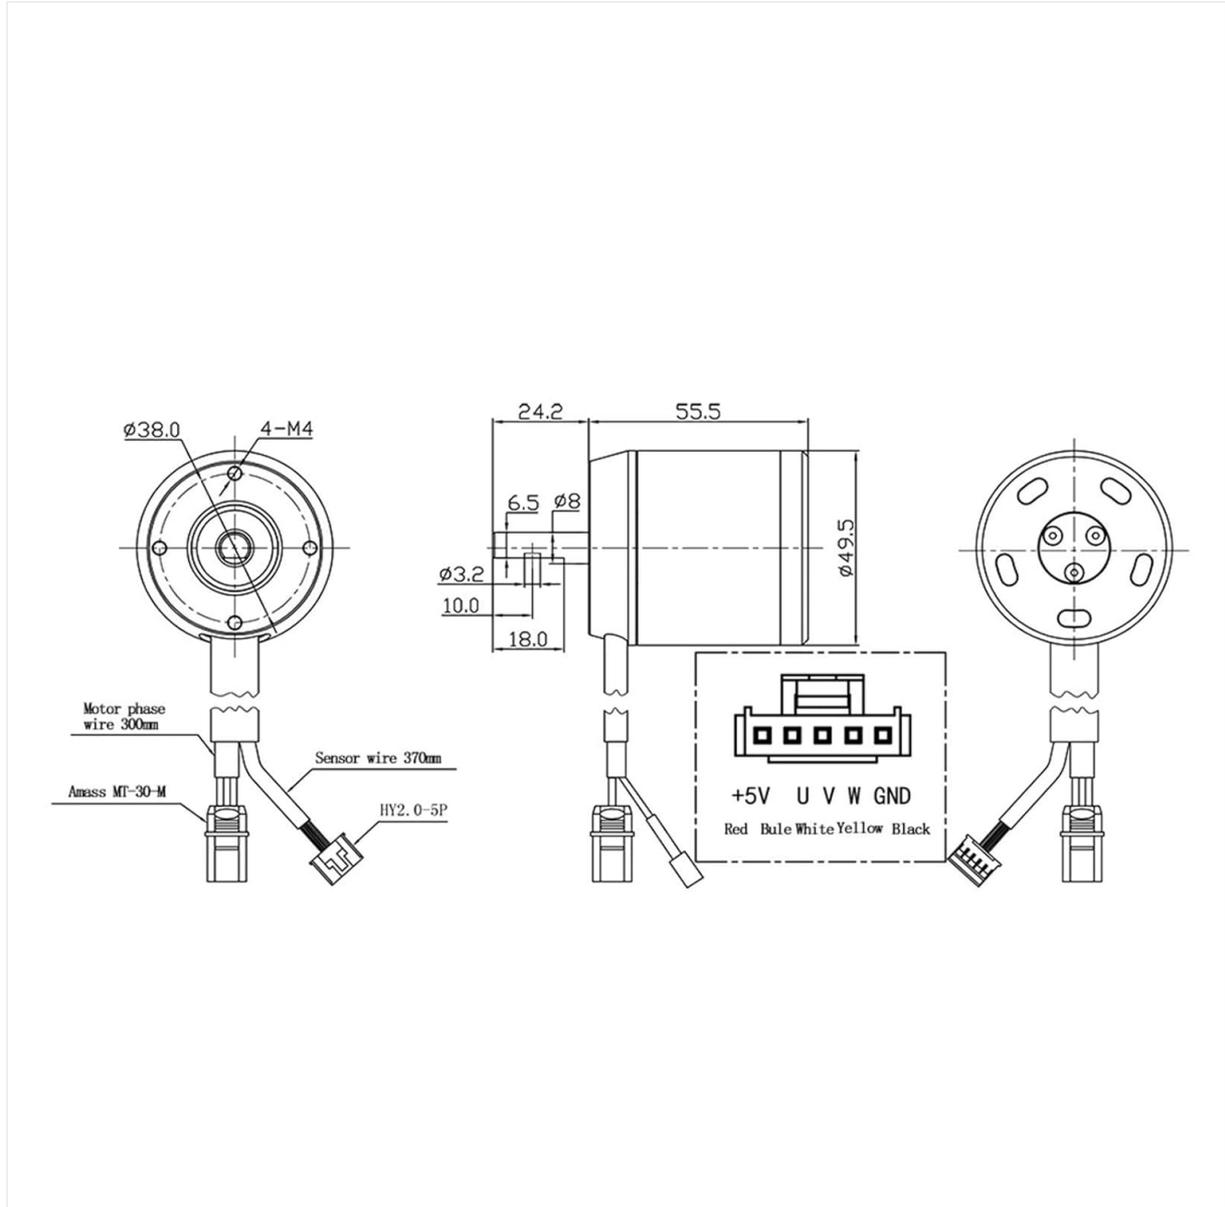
Detailed technical drawing showing the dimensions of the motor and its shaft, along with the wiring diagram for the motor phase wires (U, V, W) and the Hall sensor wires (+5V, U, V, W, GND).
